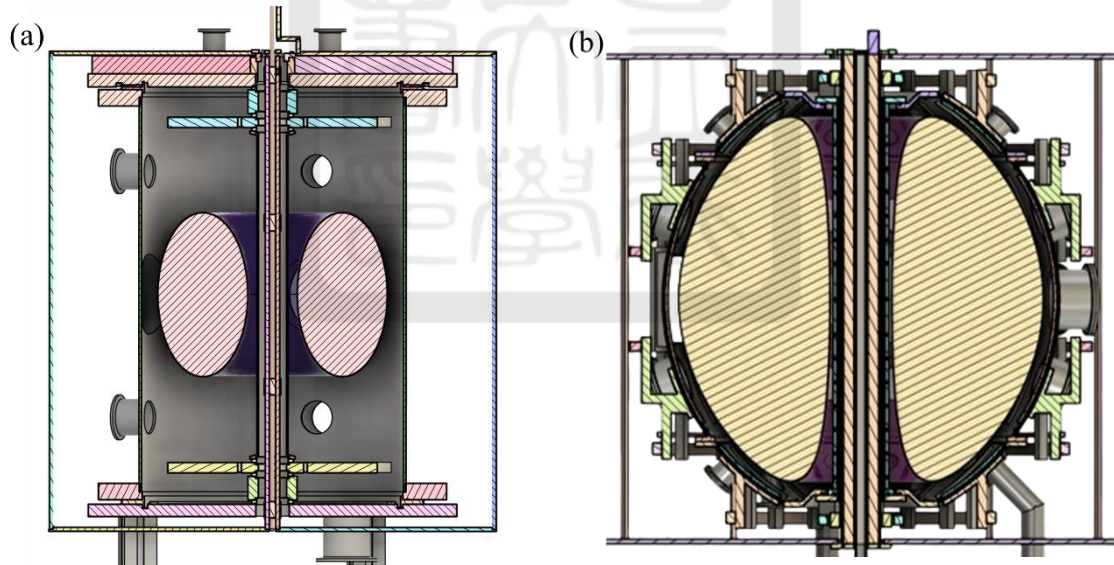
(a) Cross-sectional CAD drawings of the mini-Tokamak[6]. (b) Cross-sectional CAD drawings of the FIRST[6].
